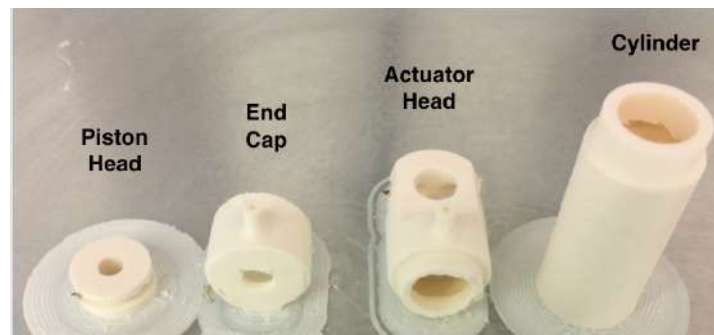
Image of the Four Main 3D Printed Parts of the A3 Actuator Assembly
